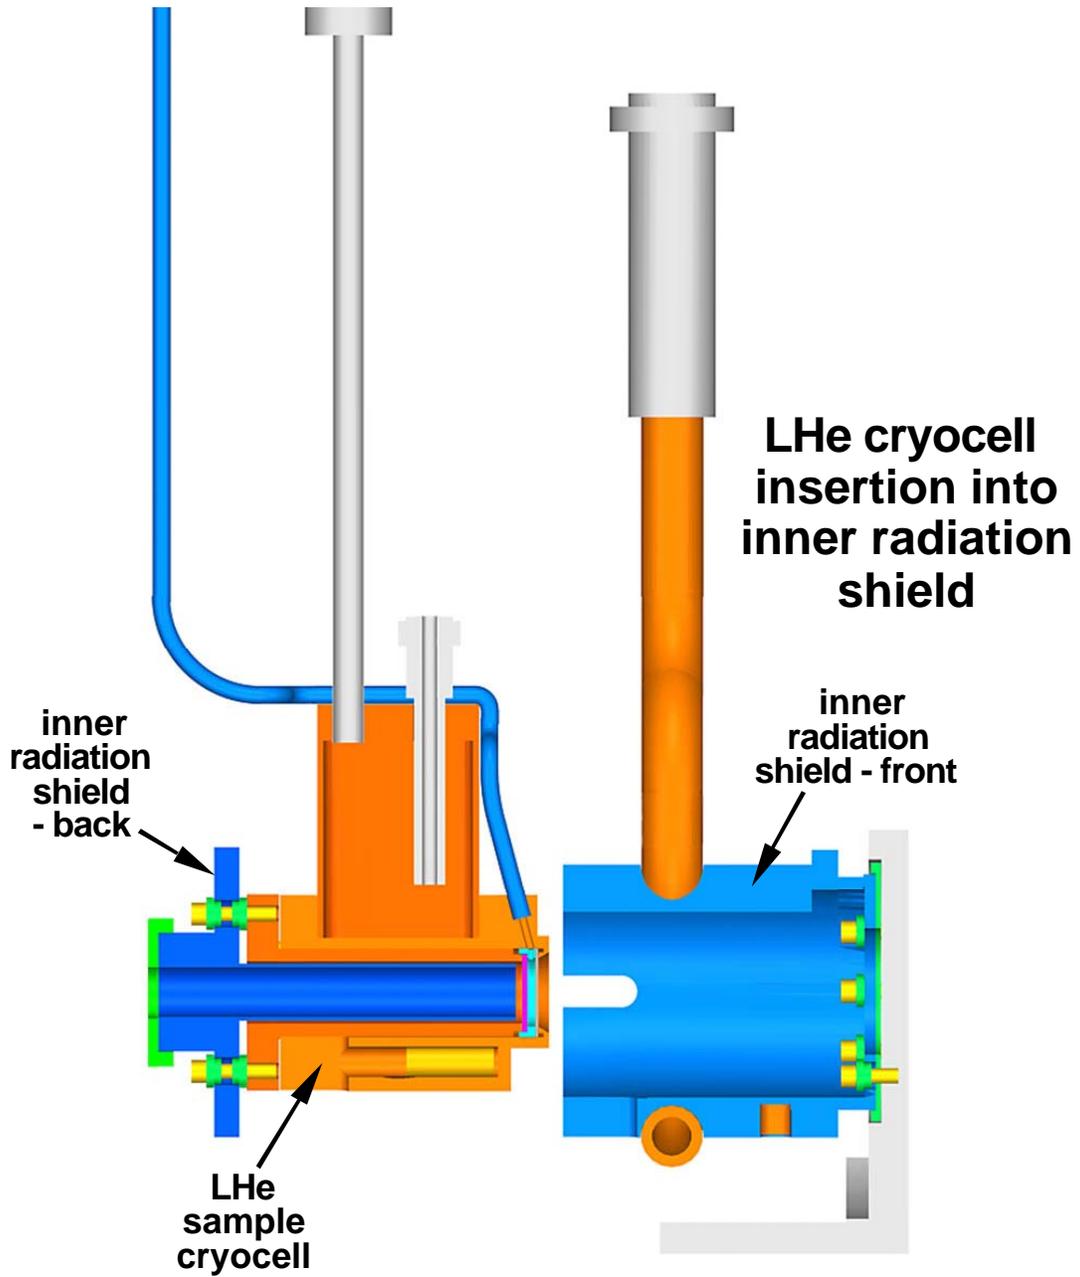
Cryocell assembly ready for insertion into front section of inner radiation shield.
